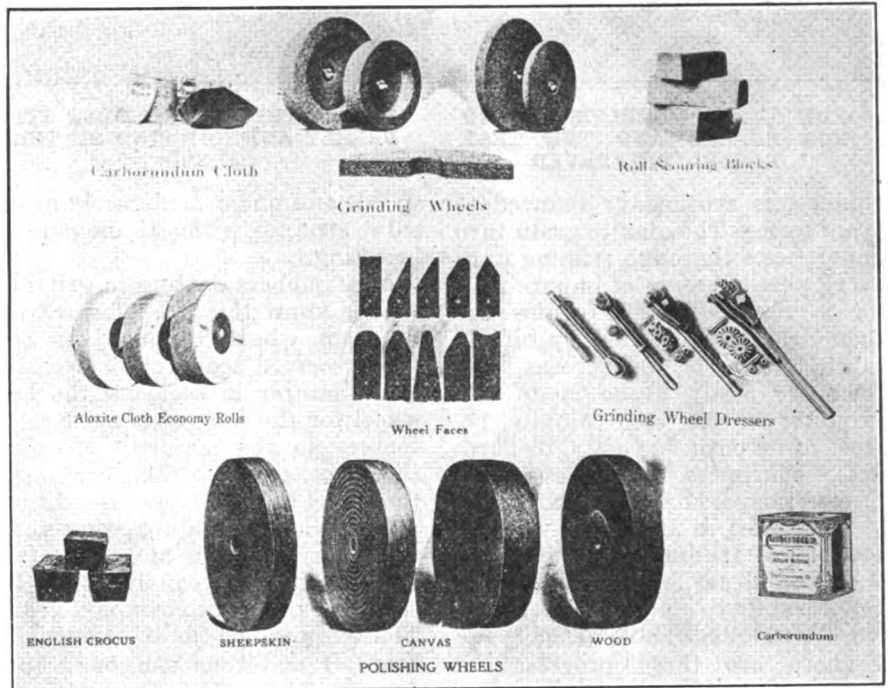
PLATE I — SHOWING SEVERAL DETAILS OF GRINDING AND POLISHING WHEELS AND SUPPLIES
